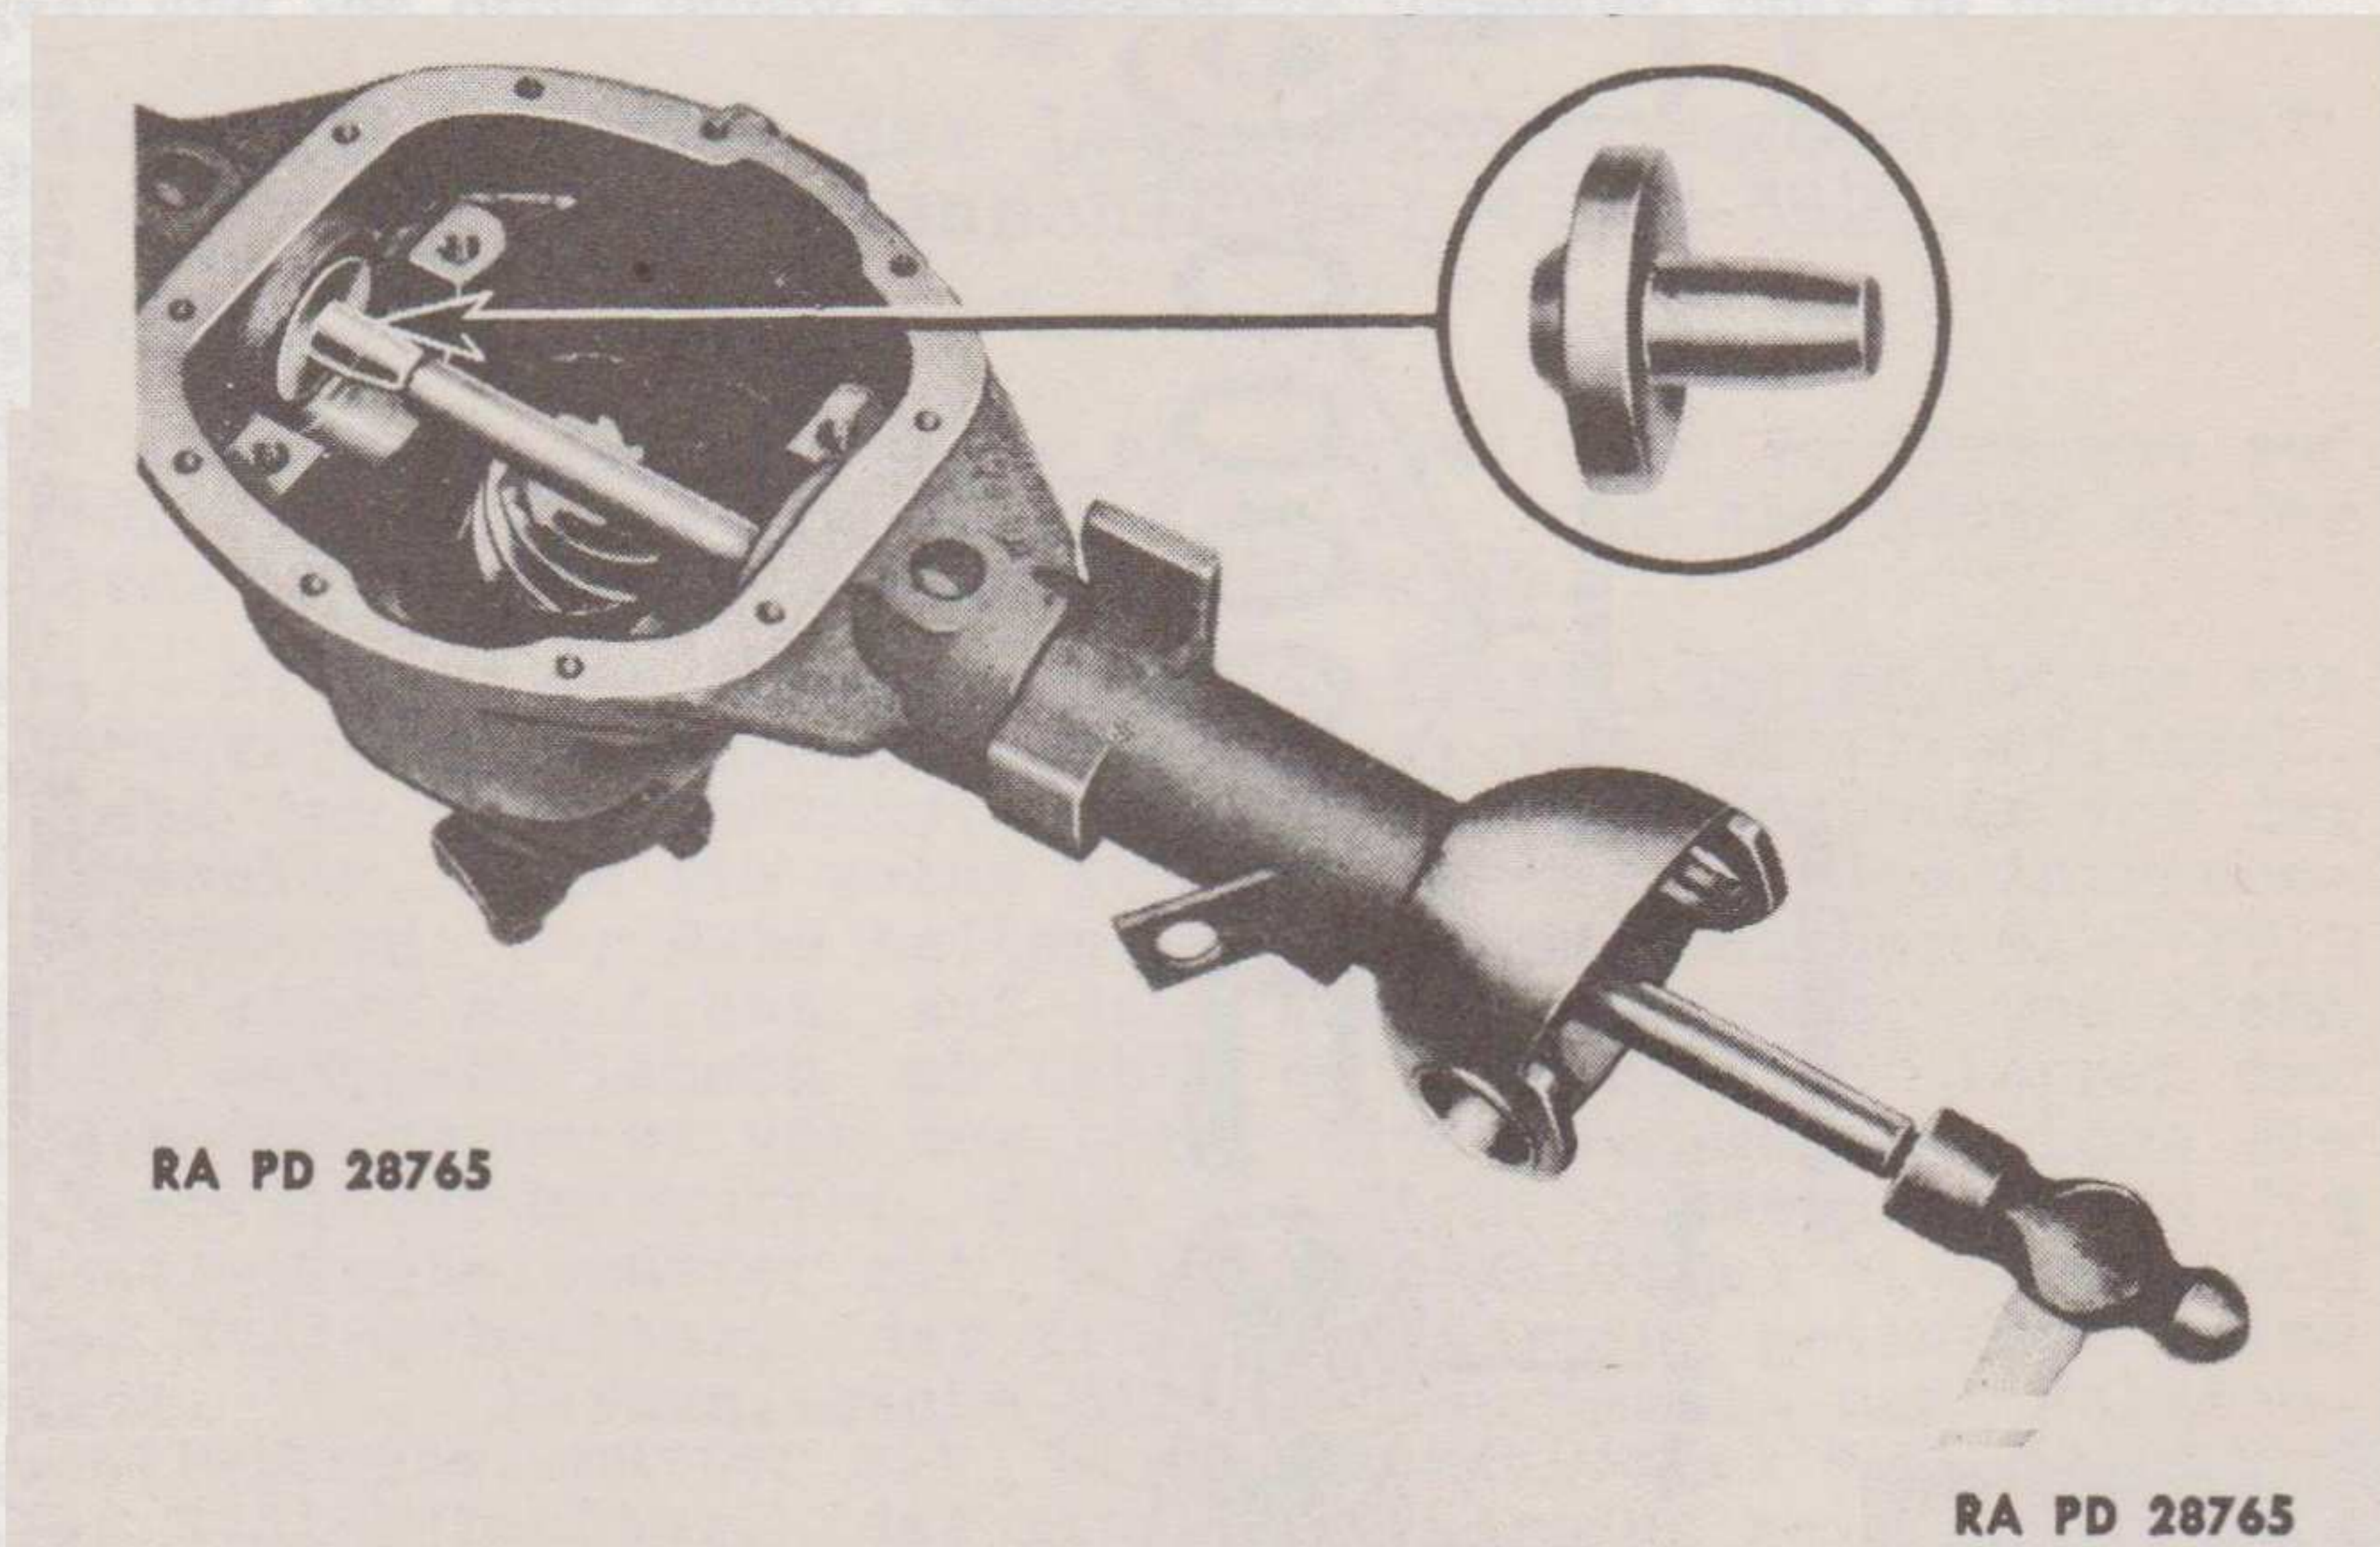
Installing Oil Seal, With Replacer 41-R-2391-20
